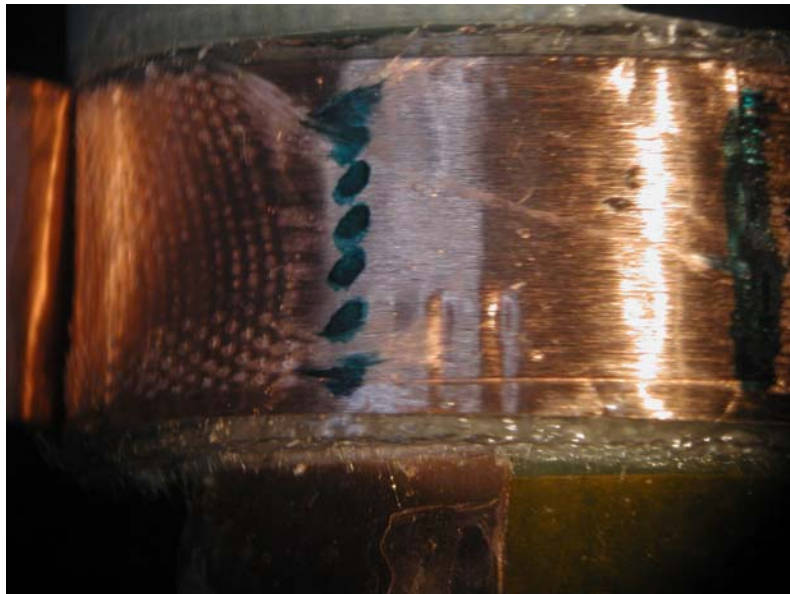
A photograph of the disassembled outer contact showing the insufficient length of the insulation
